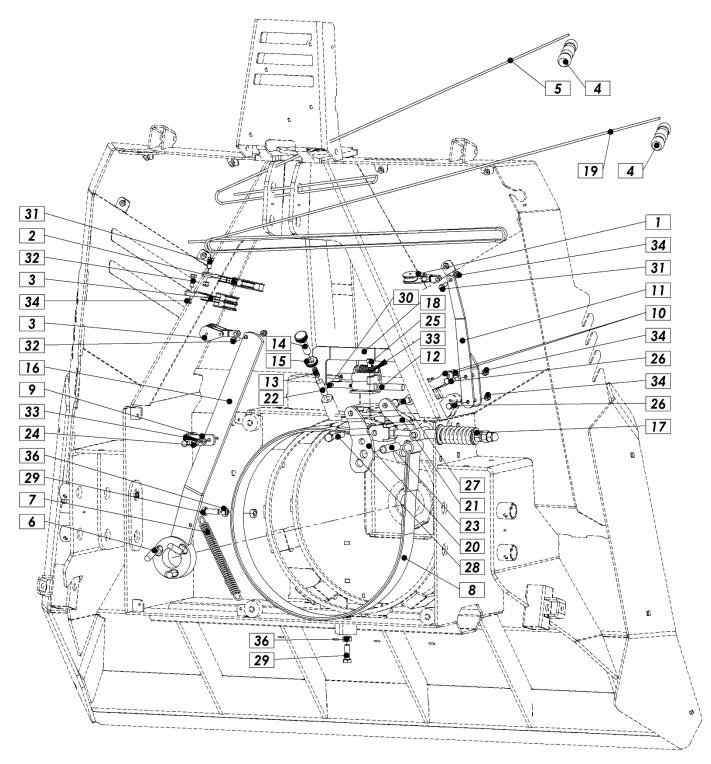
7001.05.30.0 – Brake and clutch mechanism.
